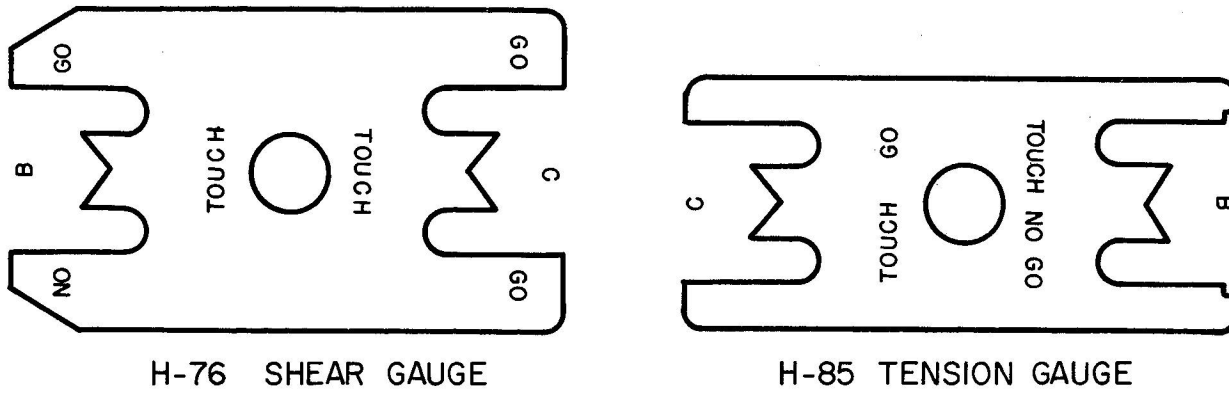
Visual Inspection of Lockbolt Swaging
